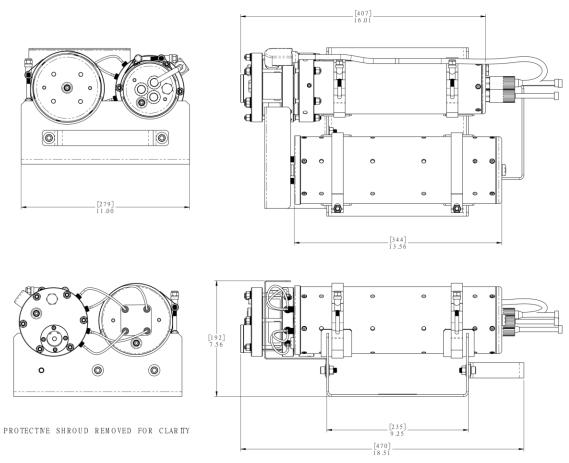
Mechanical drawings and dimensions – dual bracket (sensor and reagent housing)
